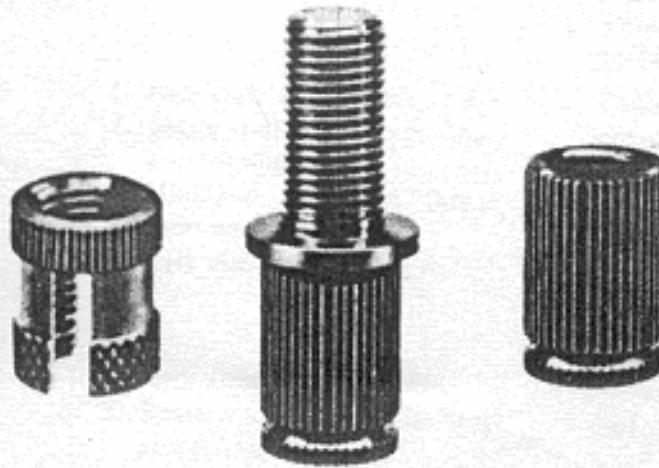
These inserts are pressed into molded or drilled holes; the collapsing end locks the piece in place. (Courtesy Fastener Products, Inc., Southport, Conn.)
